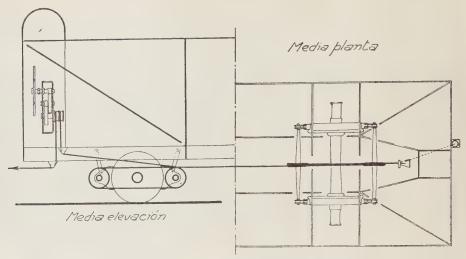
Diagram, in elevation and plan, of the continuous cable brake.
